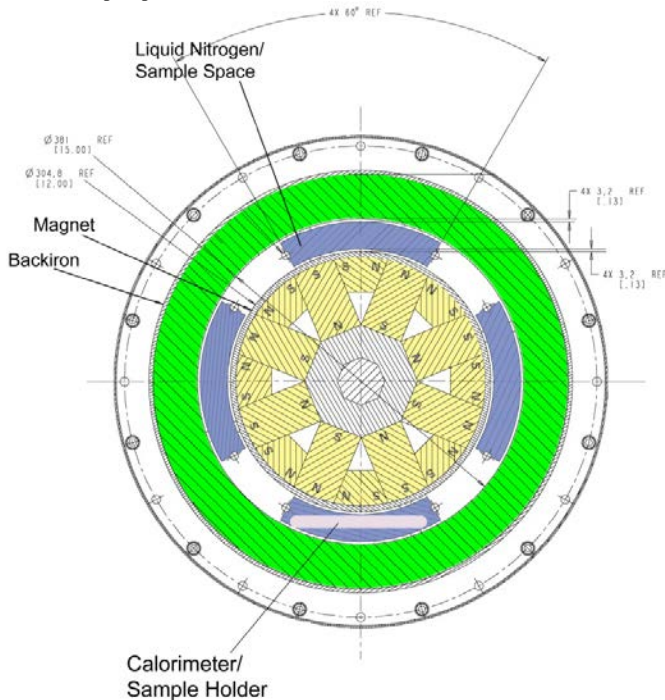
Cross section of the rotating magnets machine. Shown are eight-pole rotor assembly (maintained at room temperature), four sample chambers inside the vacuum gap, LN<sub>2</sub> - cooled sample holder (currently only one is in use), the laminated back iron, and the outer shell.
